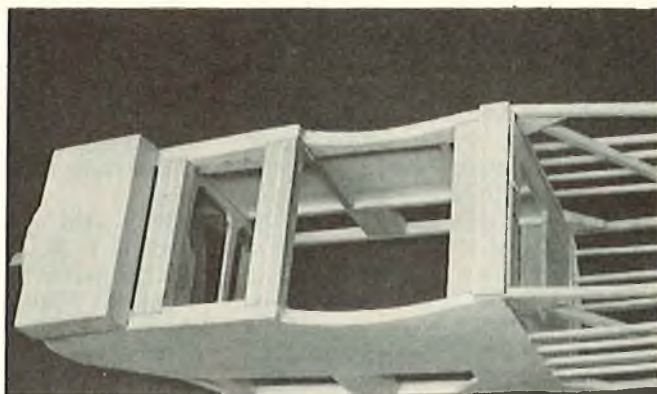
/16" sheeting, with F-1 and F-1A glued in place.
